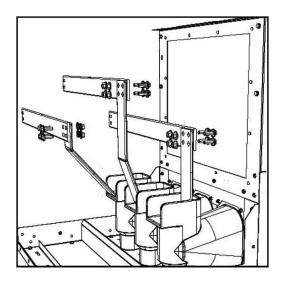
Bolted joints before mounting insulating shells; for example: end panel
